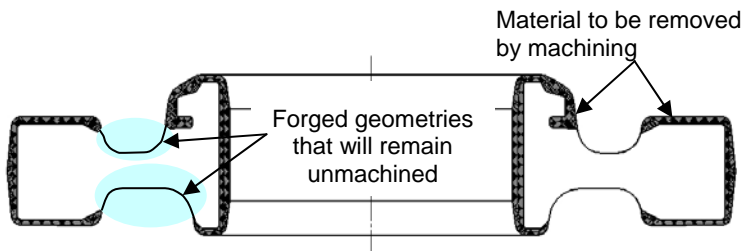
Drawing of gear blank. The blank partly represents the geometry of the finished part.
